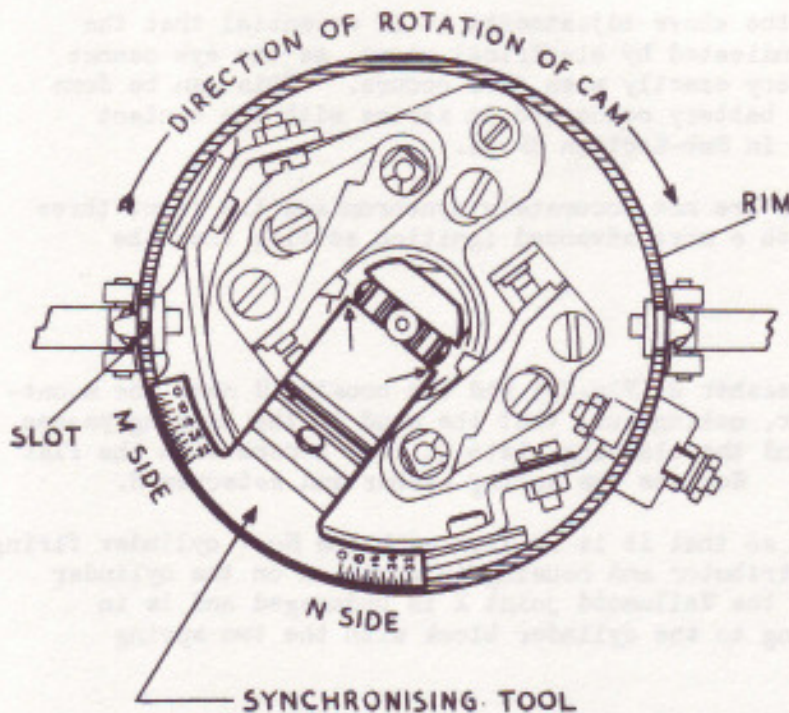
SYNCHRONISING TOOL IN POSITION.
